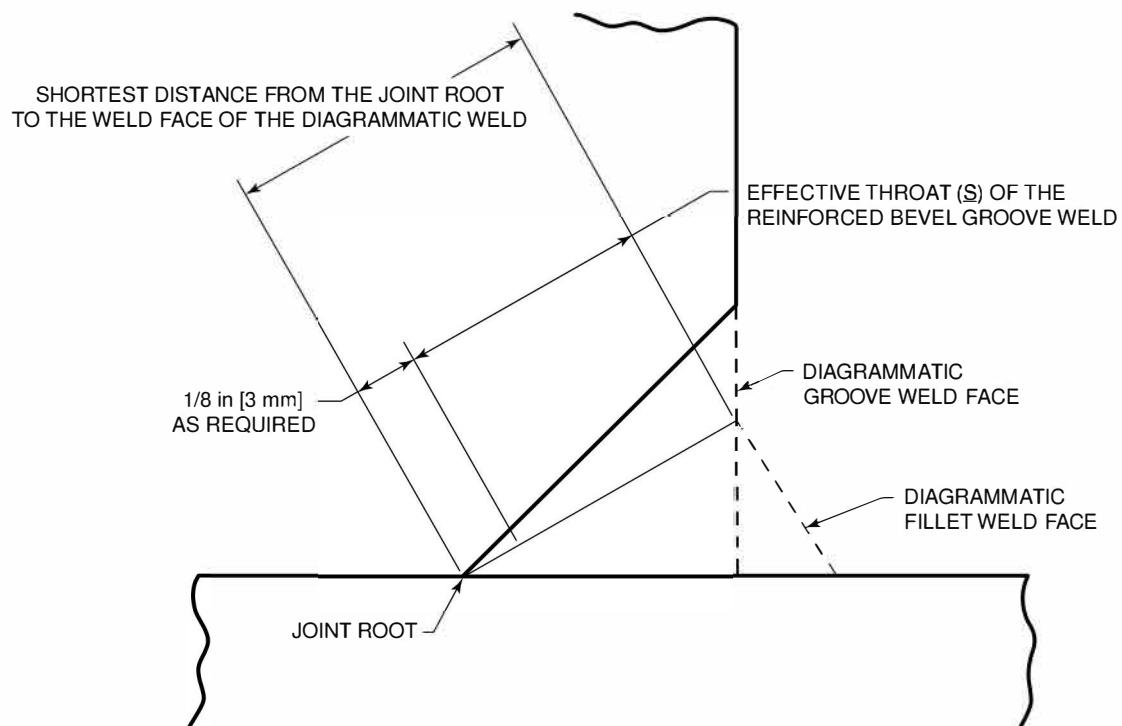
Bevel Groove Weld with Reinforcing Fillet Weld (see 4.4.2.7)
